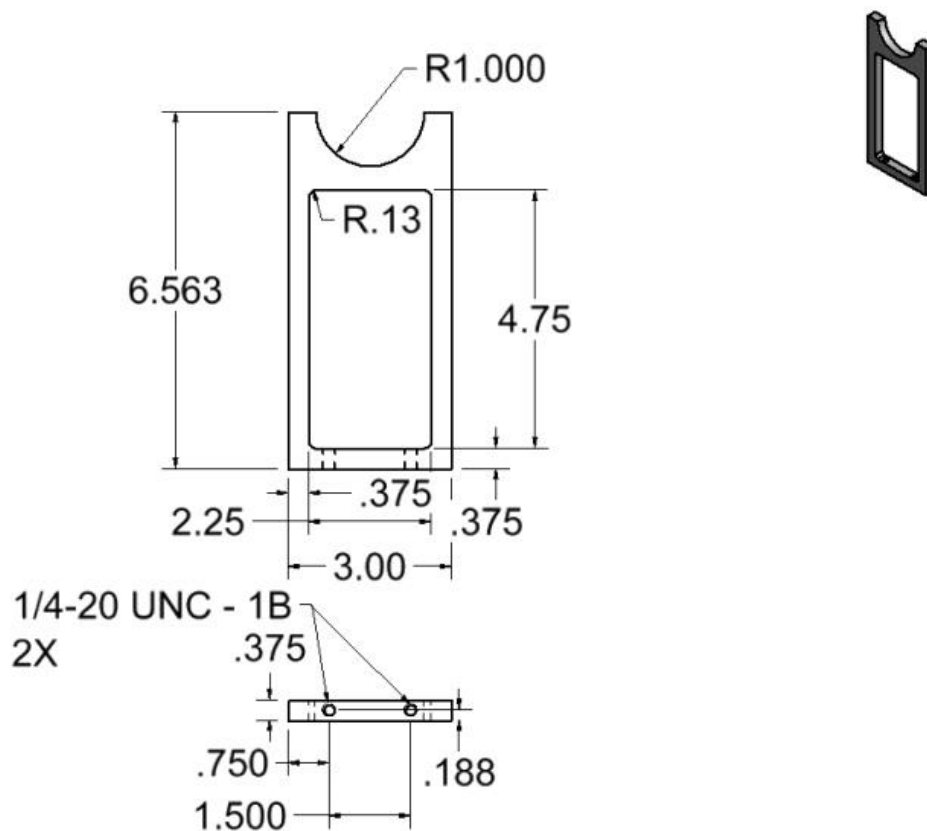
Mechanical drawing of dryer support rear (Support Stand Item 2)
